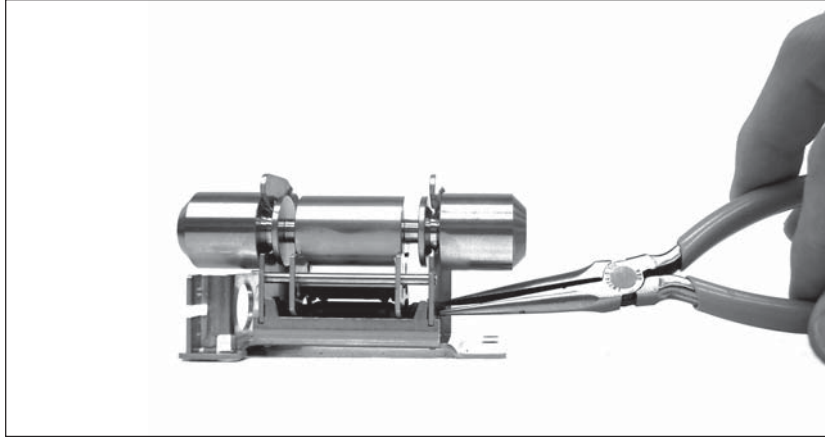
Checking Shaft Rotation on InCal Mechanism.
